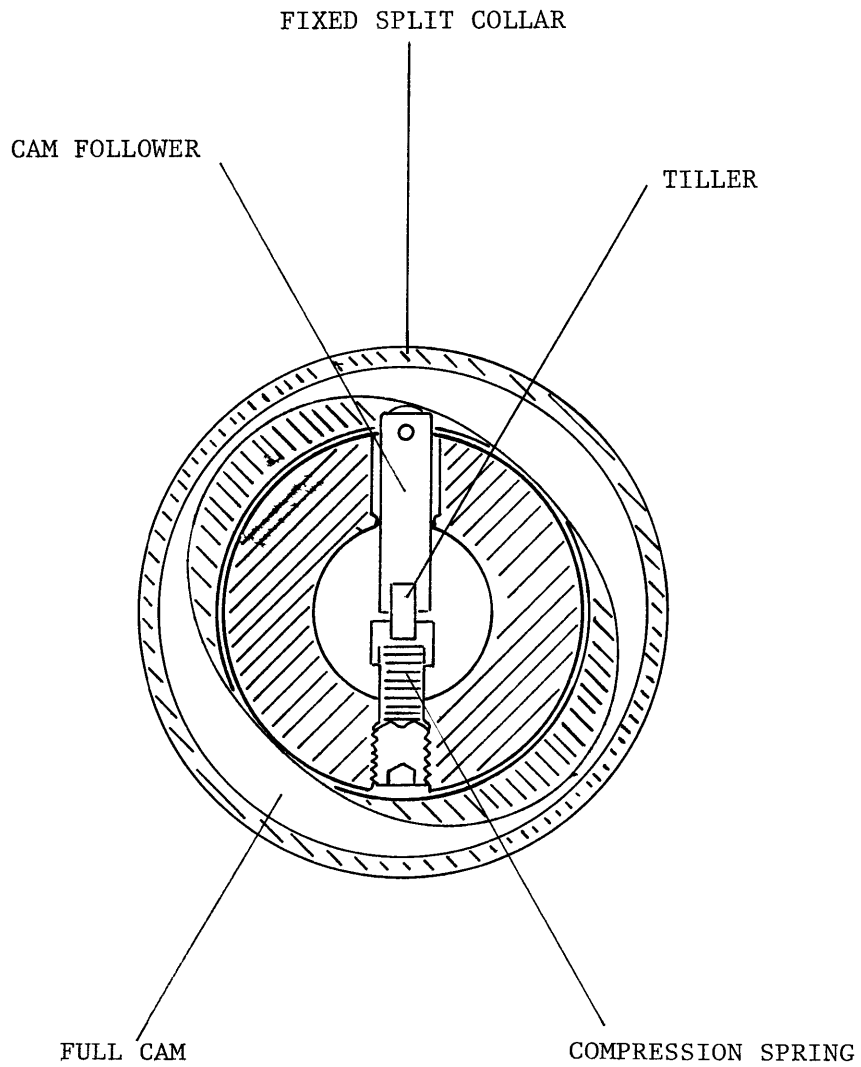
FRONT SECTIONAL VIEW OF OSCILLATING MECHANISM
